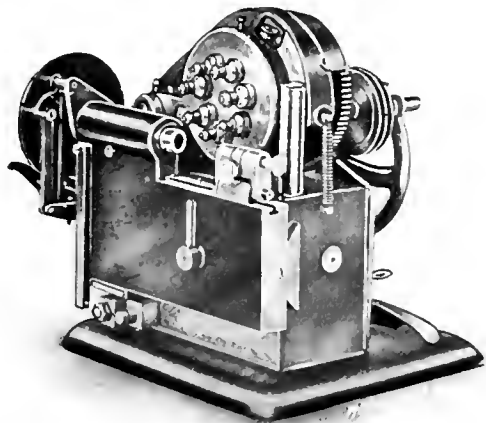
Automatic Machine for Cutting Escape Wheels for Watches.
